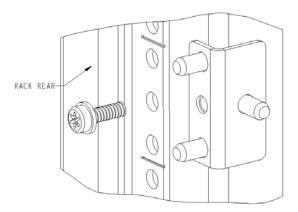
Installing the Rear Rail-Tray Brackets (HP Rack-left rear upright))
